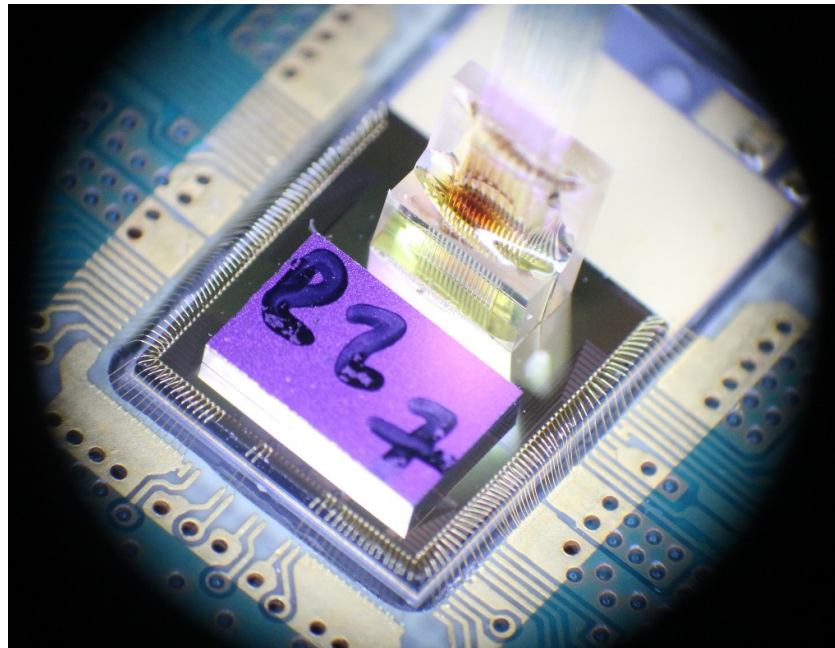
Zoomed in wire-bonding of the EPIC device into module board PCB
